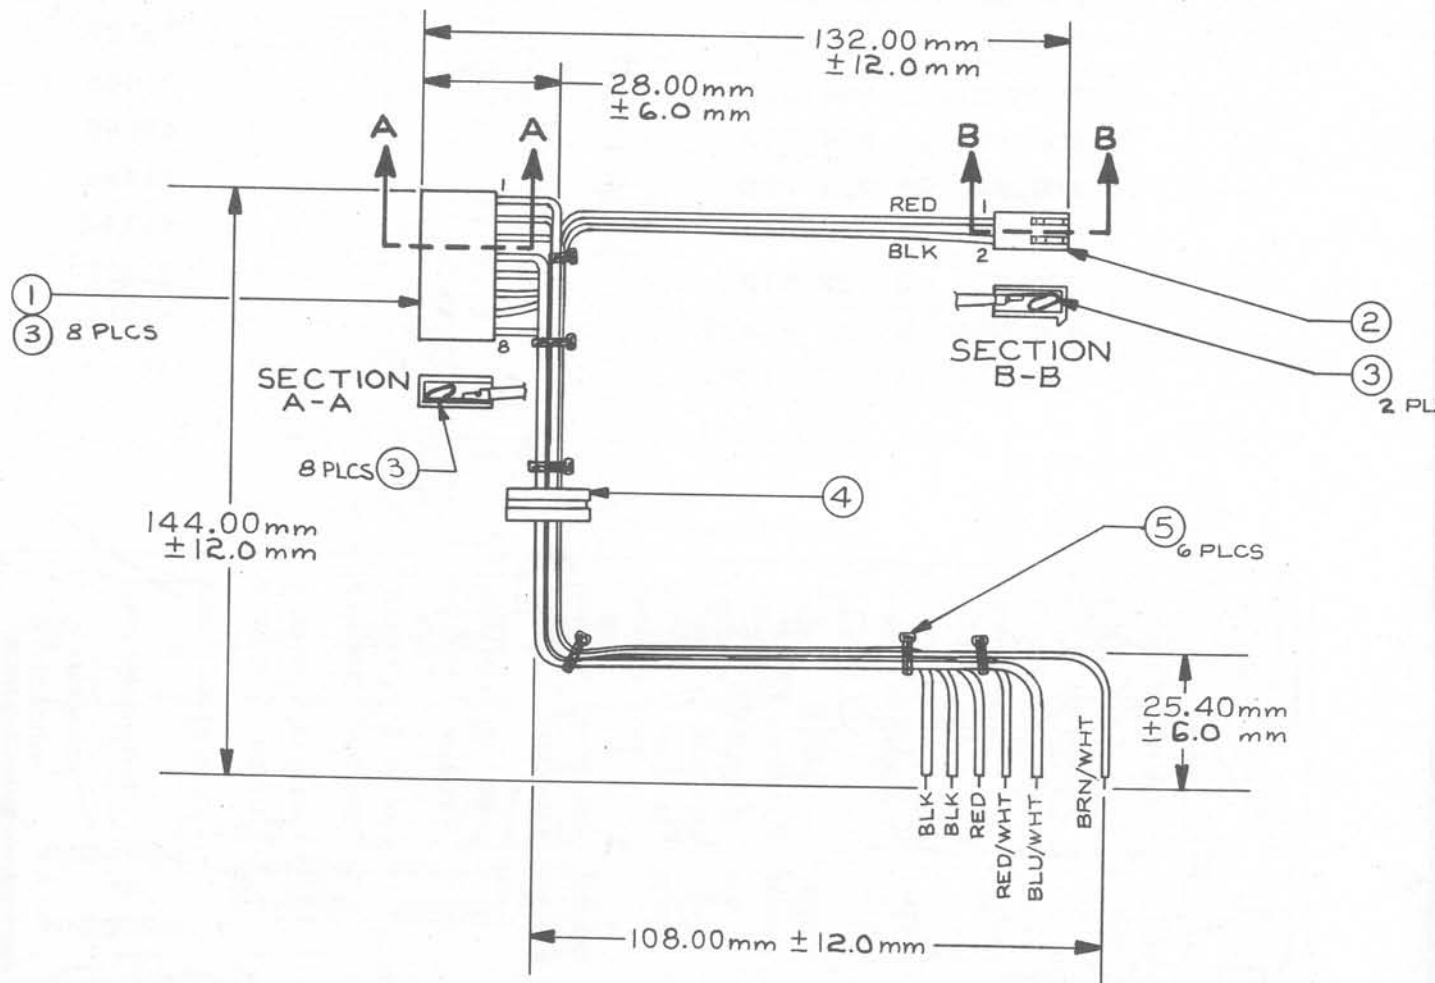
Motherboard-to-Power Supply Cable Assembly (Part No. 471111)
